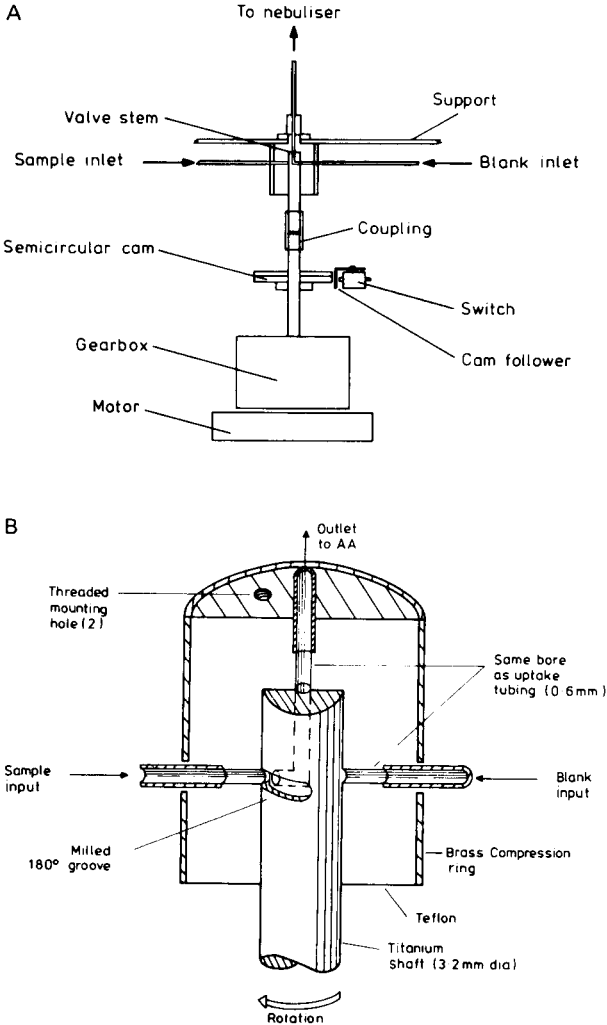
(A) Rotary sample comparison valve showing a sectional view of the relationship between components. (B) Sectional detail of valve. The titanium shaft, which rotates with respect to the teflon block, is polished, after milling to remove any burrs.
